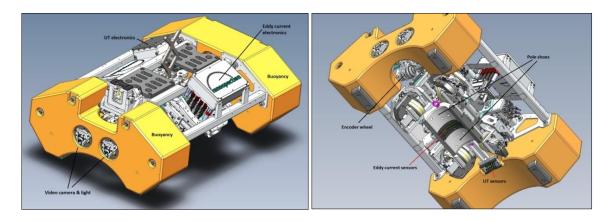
The MEC Combi Crawler tool for the inspection of subsea pipelines
